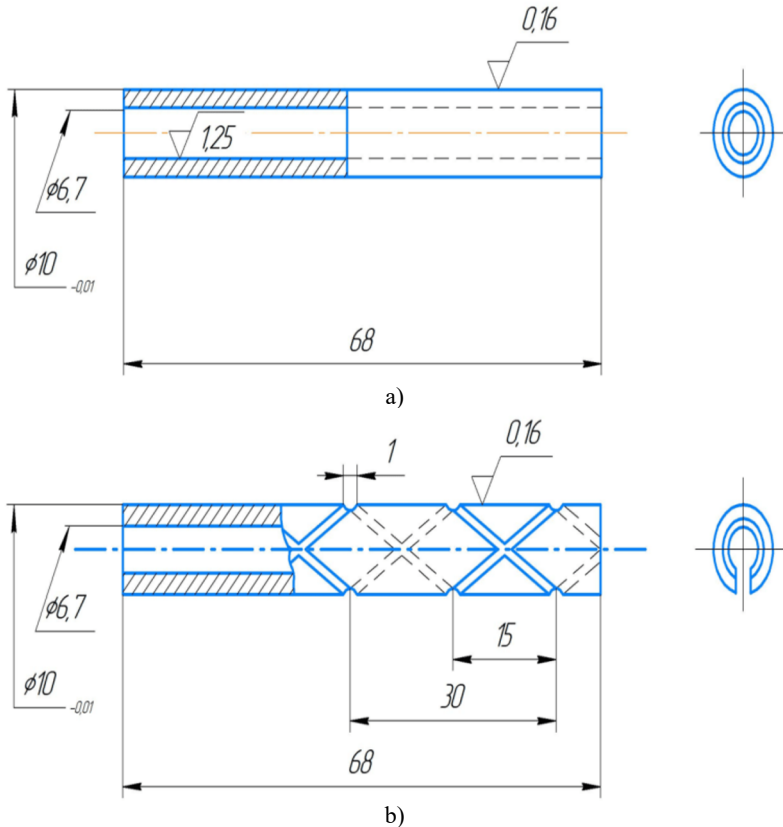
Abrasives for finishing holes. Non-adjustable case without a-groove. b - an adjustable case with a groove.
